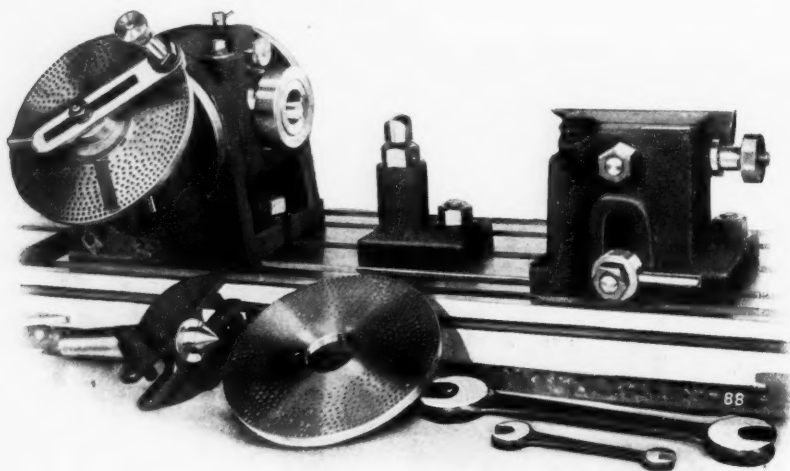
New Type of Universal Dividing Head, brought out by the Kemp Smith Manufacturing Co., Milwaukee, Wis.
